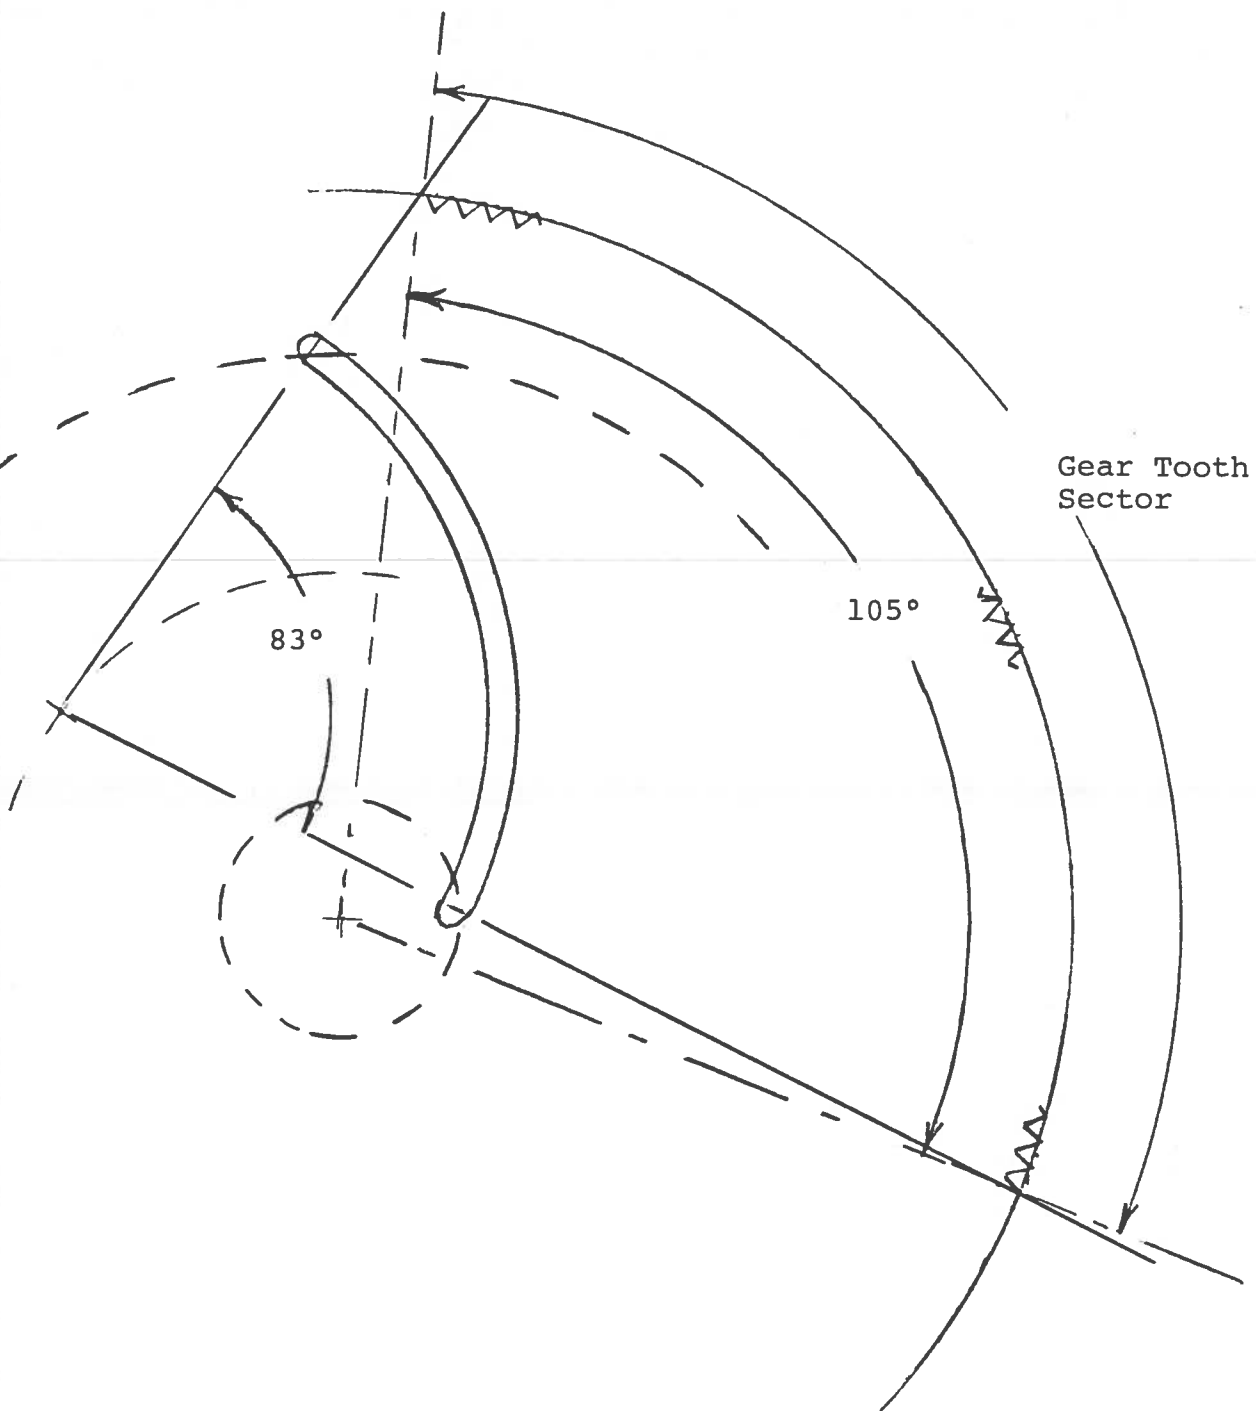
The Gear Sector of the Moving Cam Plate.
